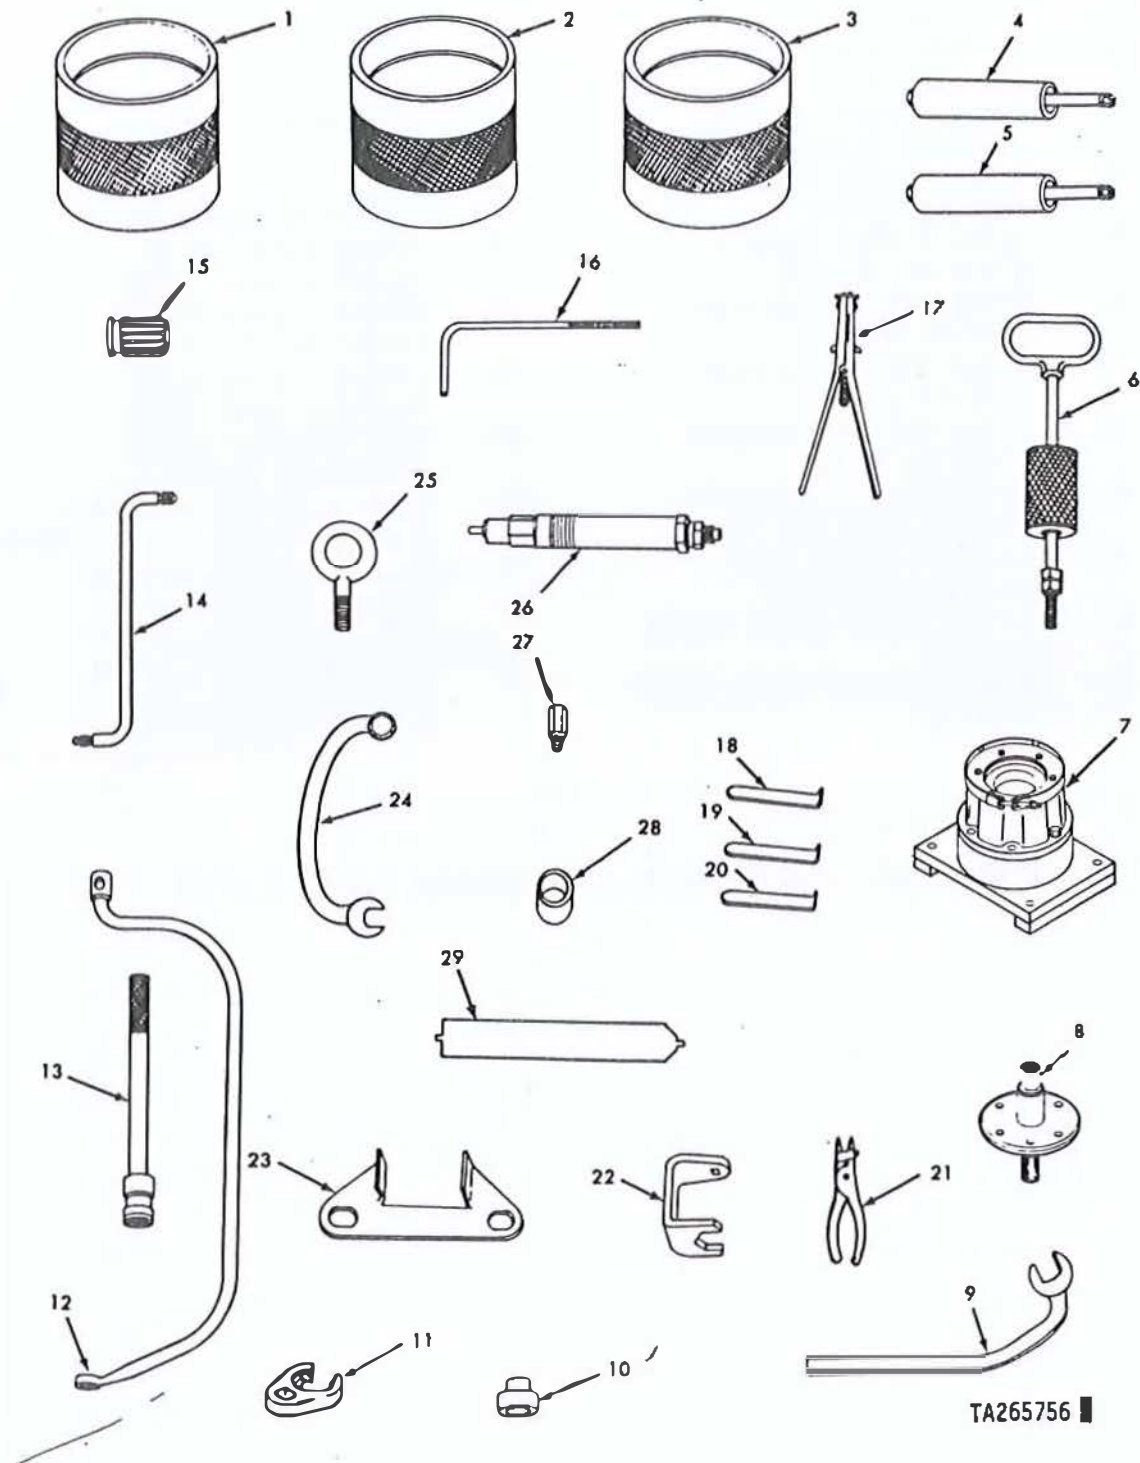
Special tools and equipment (sheet 1 of 2)
